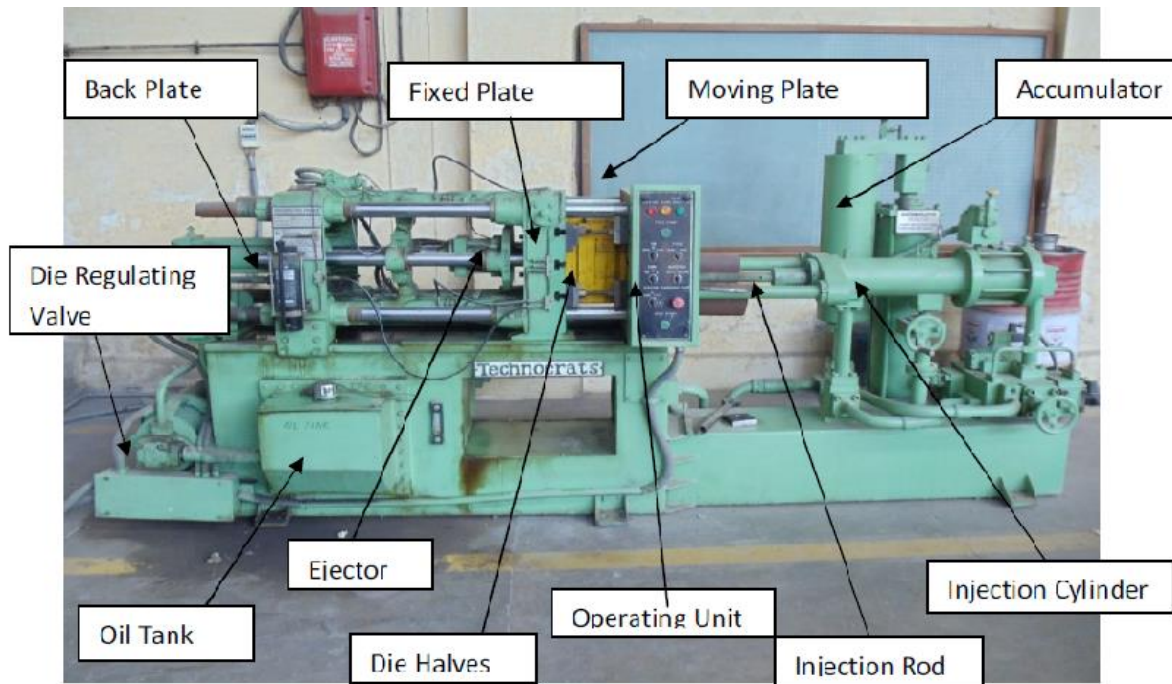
80 tons High Pressure Die Casting Machine at Thapar University Workshop
